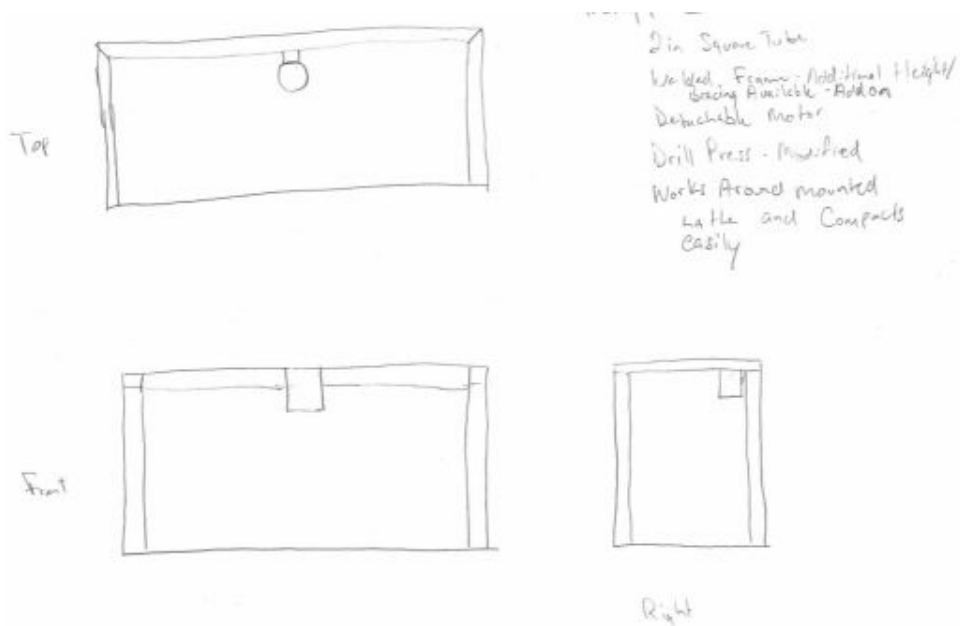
Concept 4: Modified Standard Drill Press Mounting
